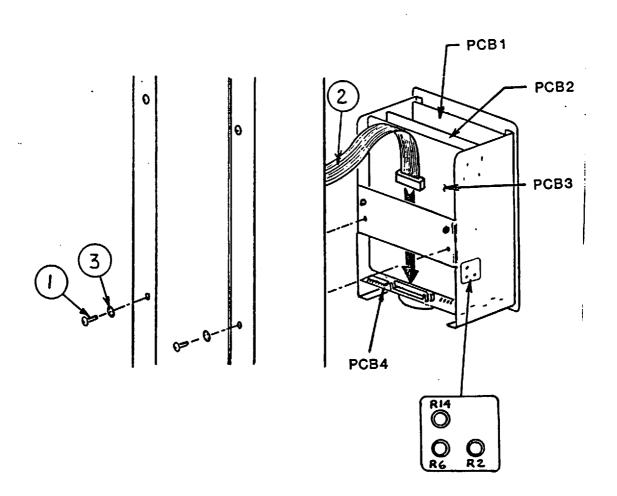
CONTROLLER MODULE REMOVAL AND REPLACEMENT, ADJUSTMENT AND CONNECTION POINTS
